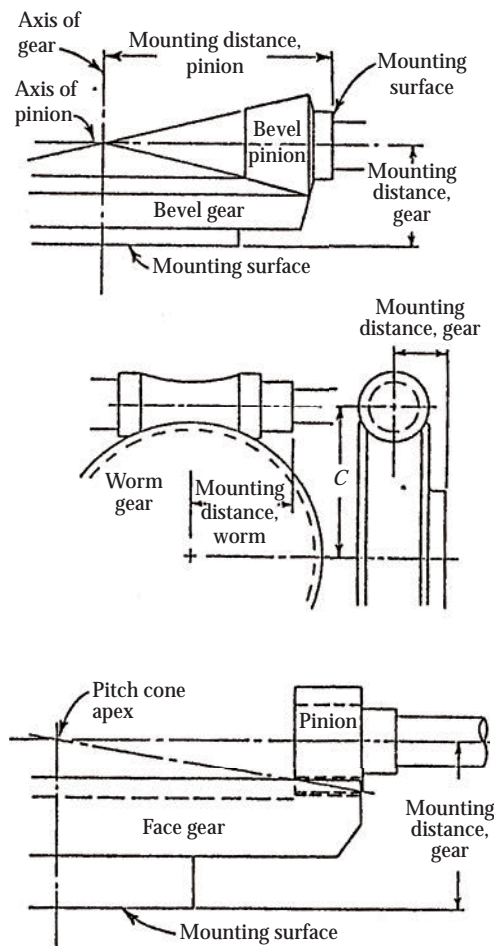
Mounting distance, shown for various kinds of gears, is the distance from the axis of a gear to the mounting surface of its mating gear. This distance is measured parallel to the shaft of the subject gear.
